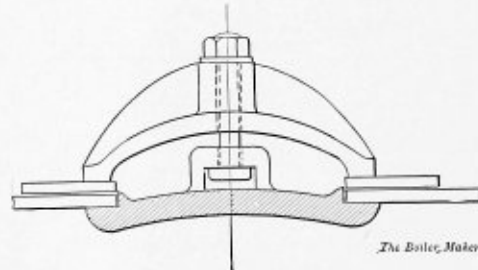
MANHOLE REINFORCED WITH STEEL LINER PLATE.
